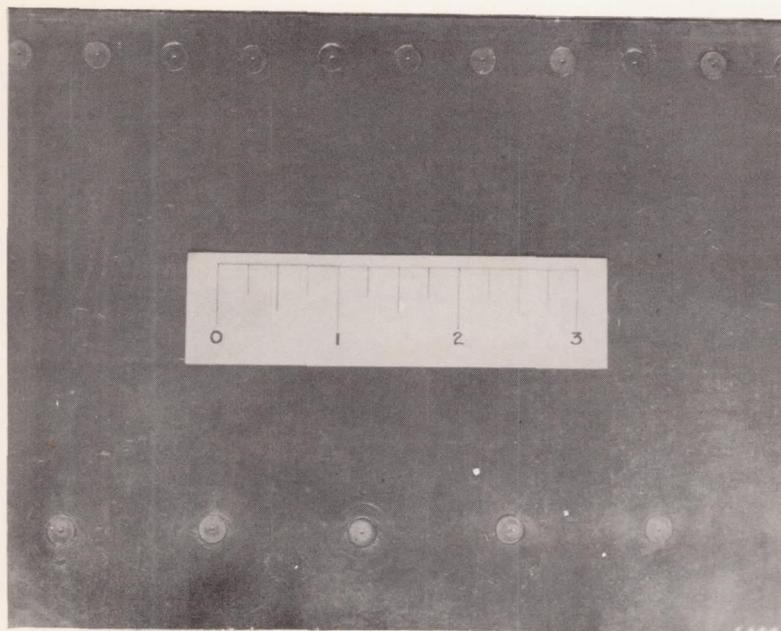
Rivets on a wing surface that do not completely fill the counter-sunk hole and are not perfectly flush.
